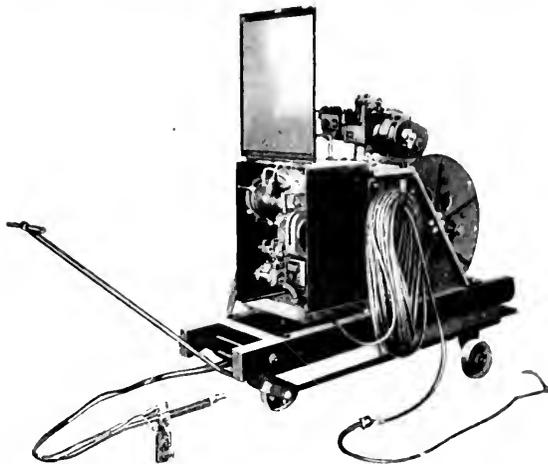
Portable Semi-automatic Welding Equipment
